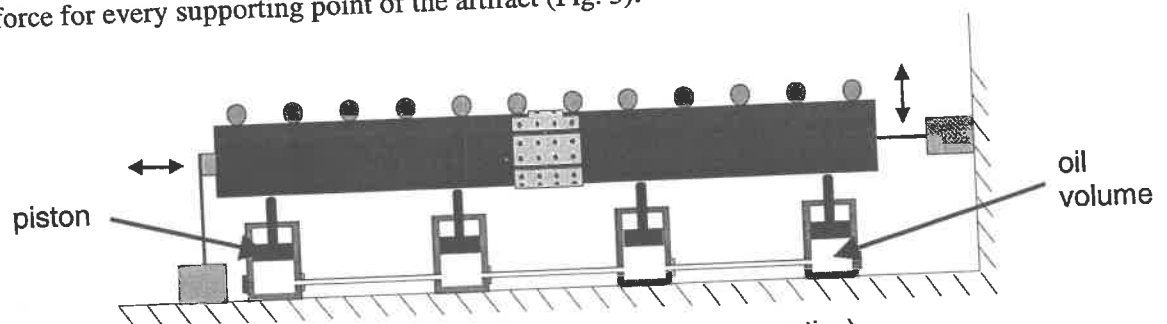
Scheme of the hydraulic mounting system (here e.g. 4 point mounting)
